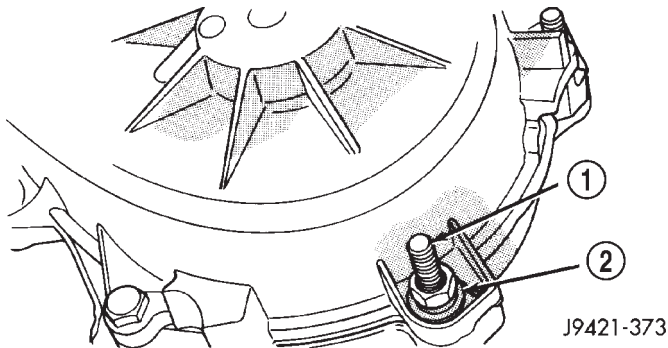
Washer Installation On Case Stud And Dowel Bolts
